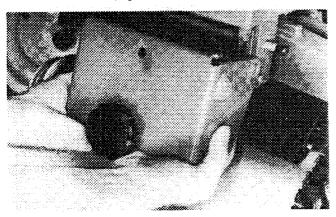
Install Pulley Box INSTALL DRIVE BELT AND COVER (Fig. 7 & 8)
